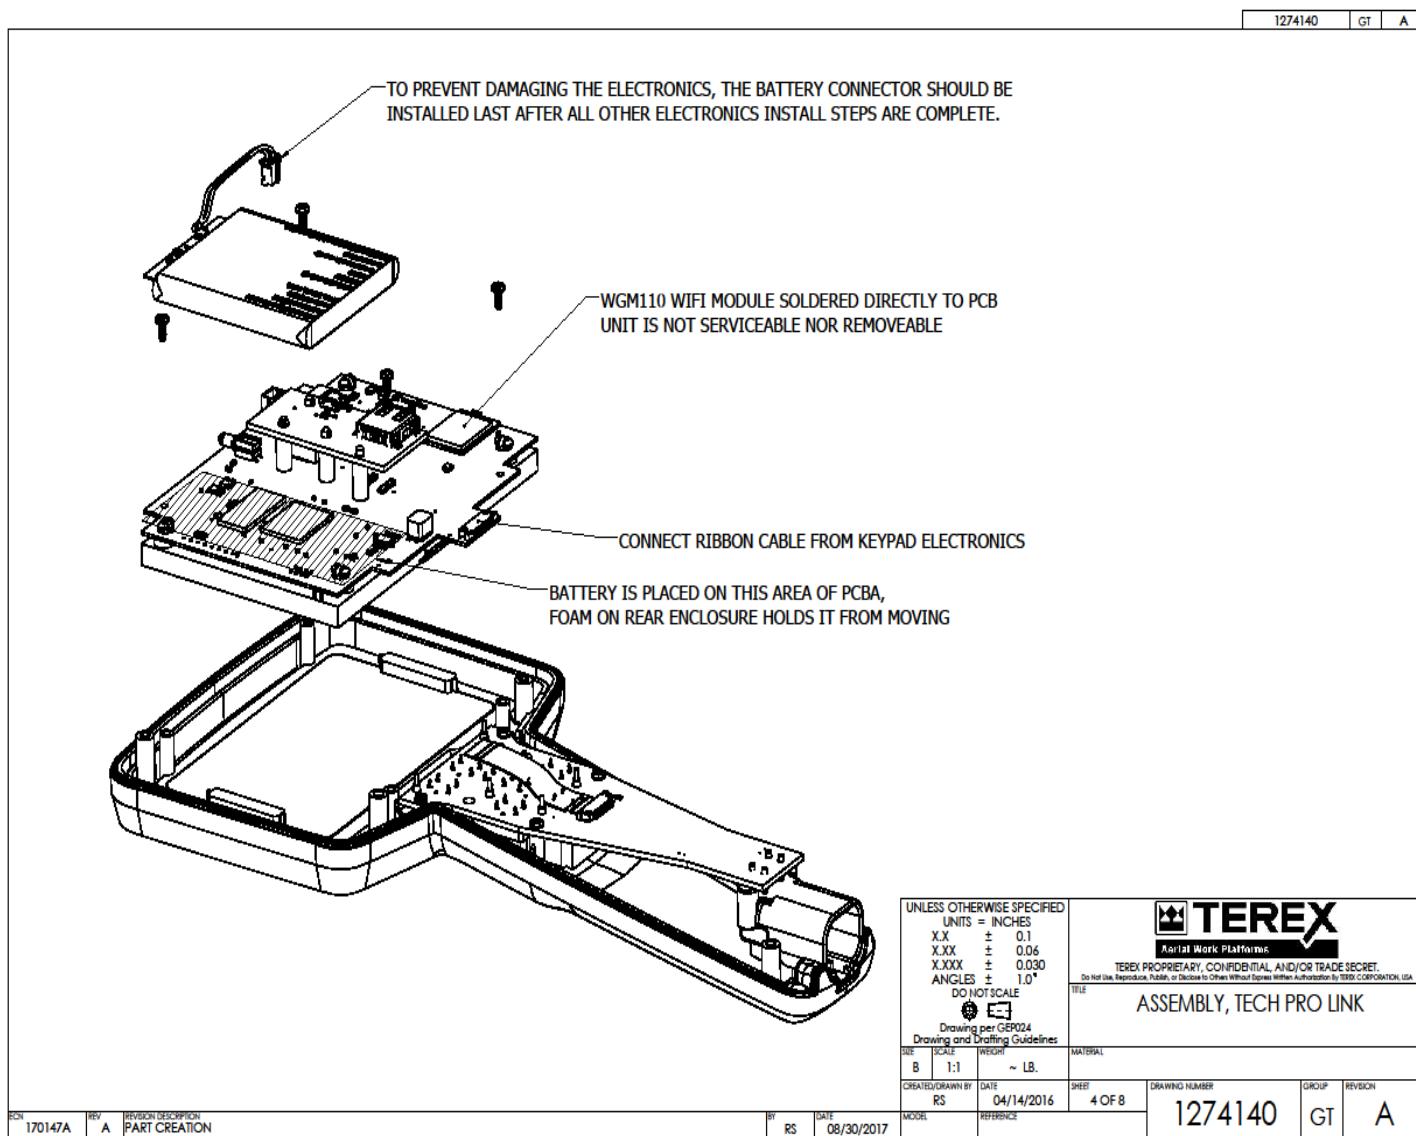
LCD PCBA Installation showing WGM110 placement
